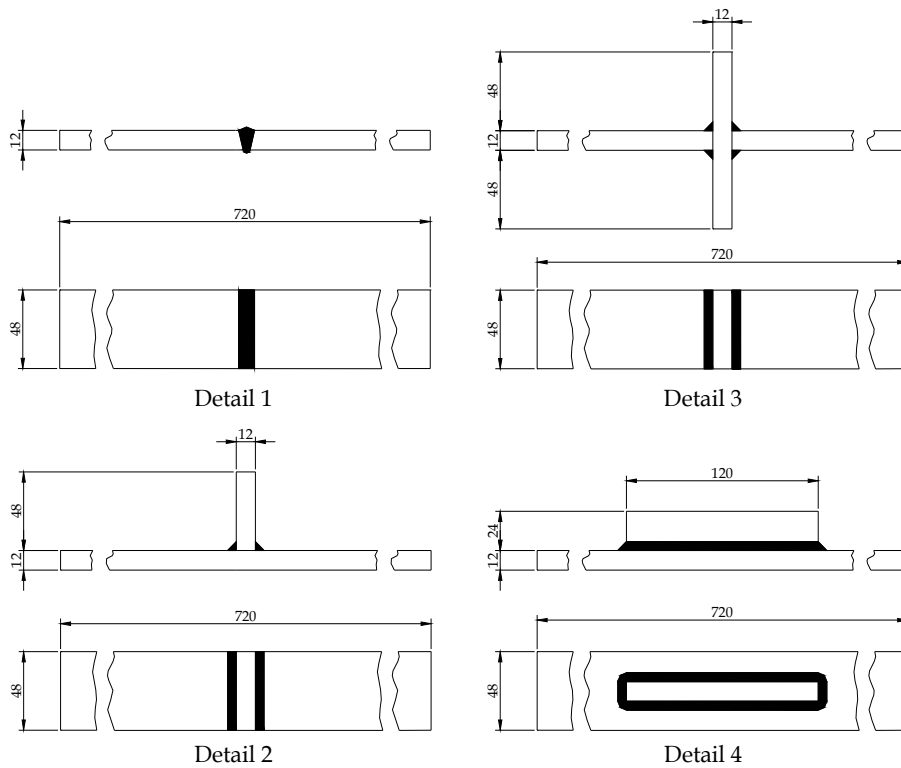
Welded joints made of 6061-T651 aluminium alloy (dimensions in mm)
